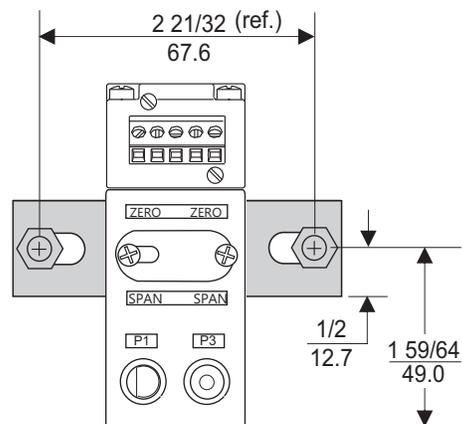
Optional Mounting Kit 19254-1 (Sold Separately)
